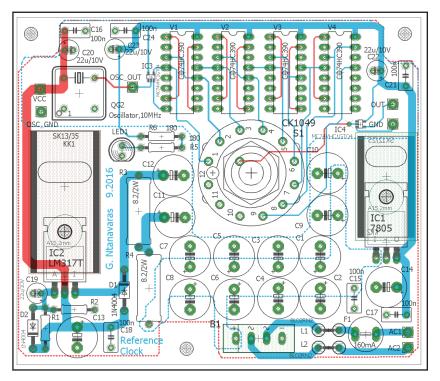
Here is the PCB assembly of the Reference Oscillator.
